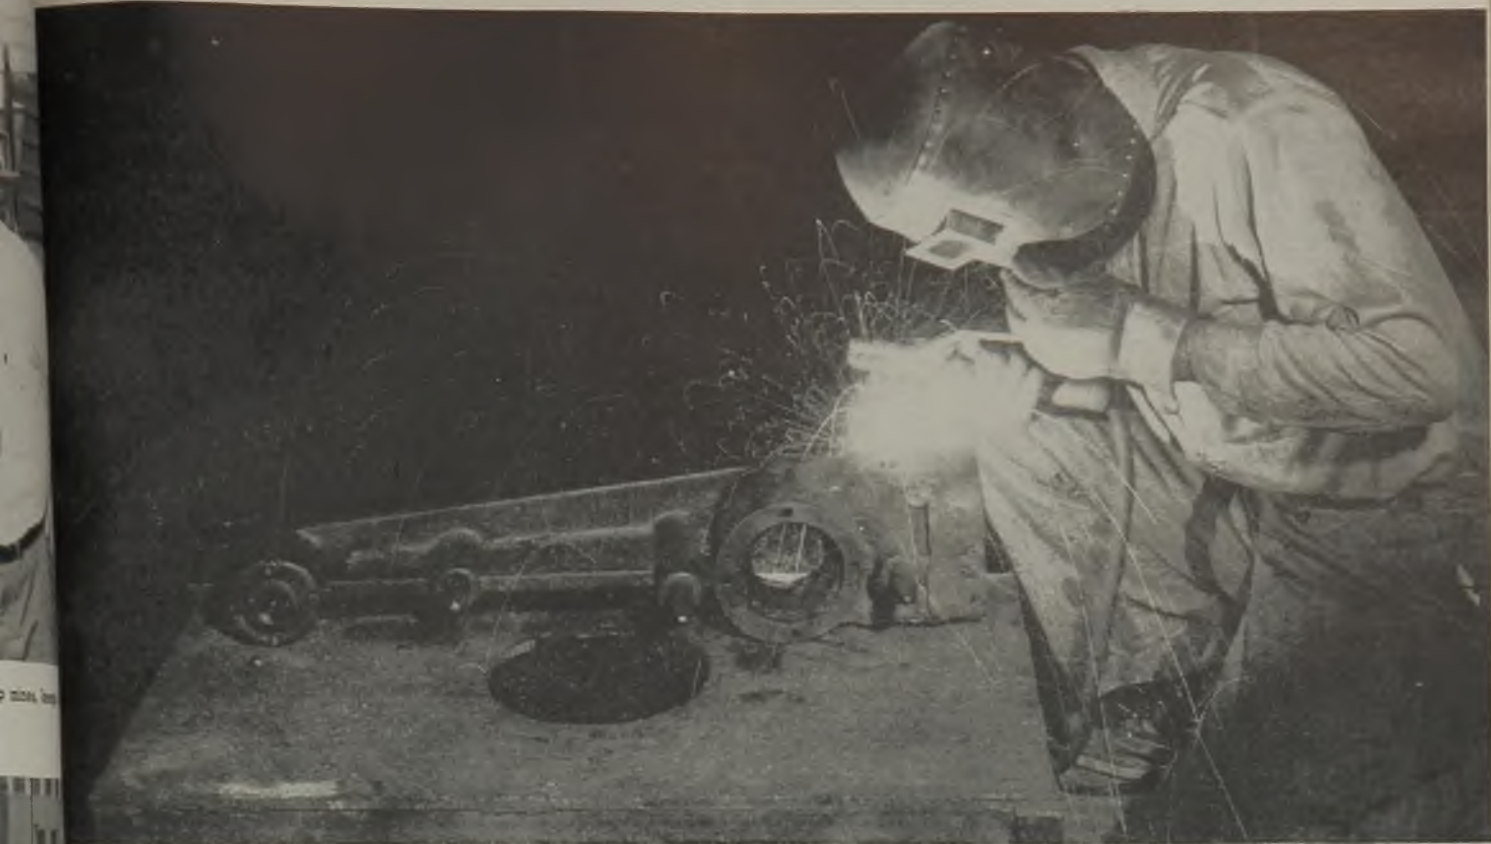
Rebuilding worn loading-arm brackets requires two operations—reinforcing the end band and rebuilding the bore. About five hours of labor is required to complete the job.
